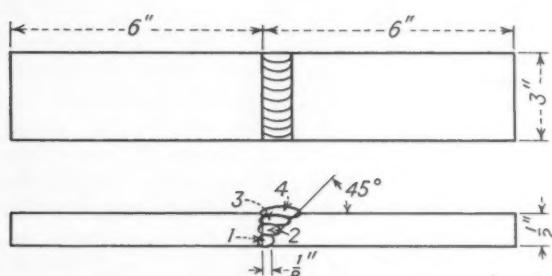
Method to follow to make a single bevel butt weld between 1/2-in. plates by using flux coated electrodes.
